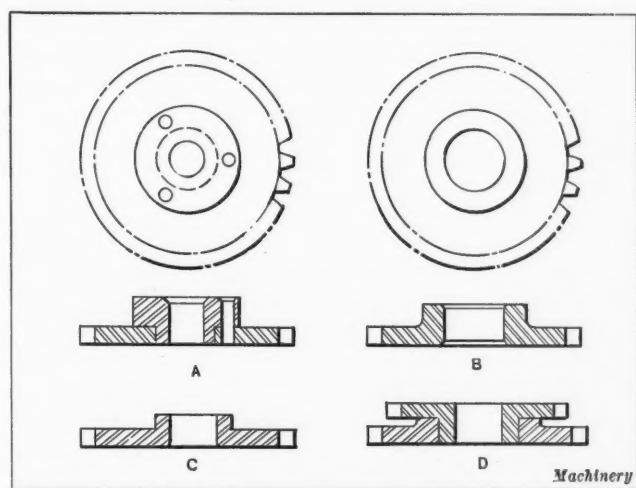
Typical Examples of Gears that may be manufactured by the Use of Punches and Dies
